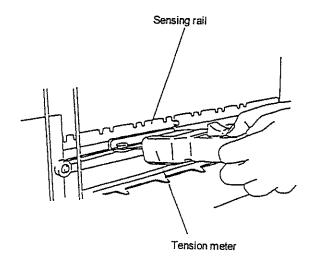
Tension Measurement of Driving Wire (Axis Z)
